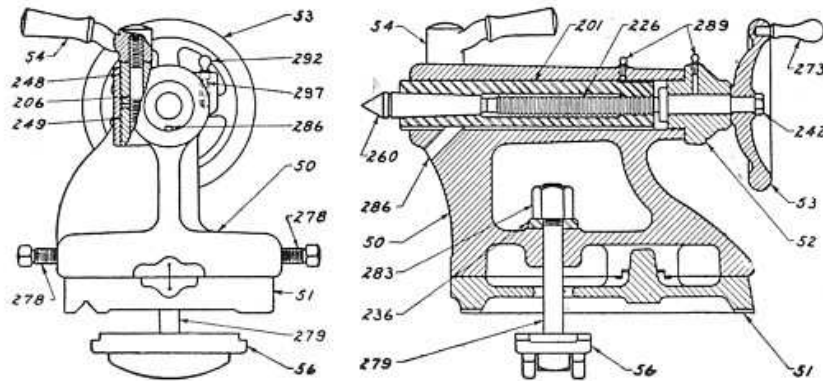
Line Drawing of Tailstock Unit Showing Position of Parts in Assembly.
